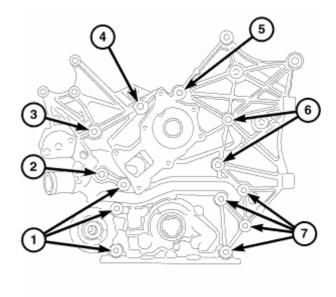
Timing Cover Bolt Location Courtesy of CHRYSLER LLC
